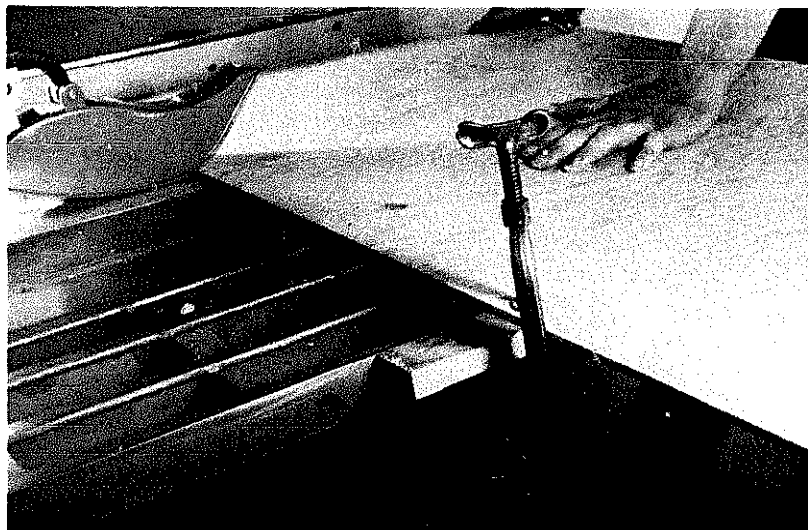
A guide strip is clamped to the plywood being sawed.
